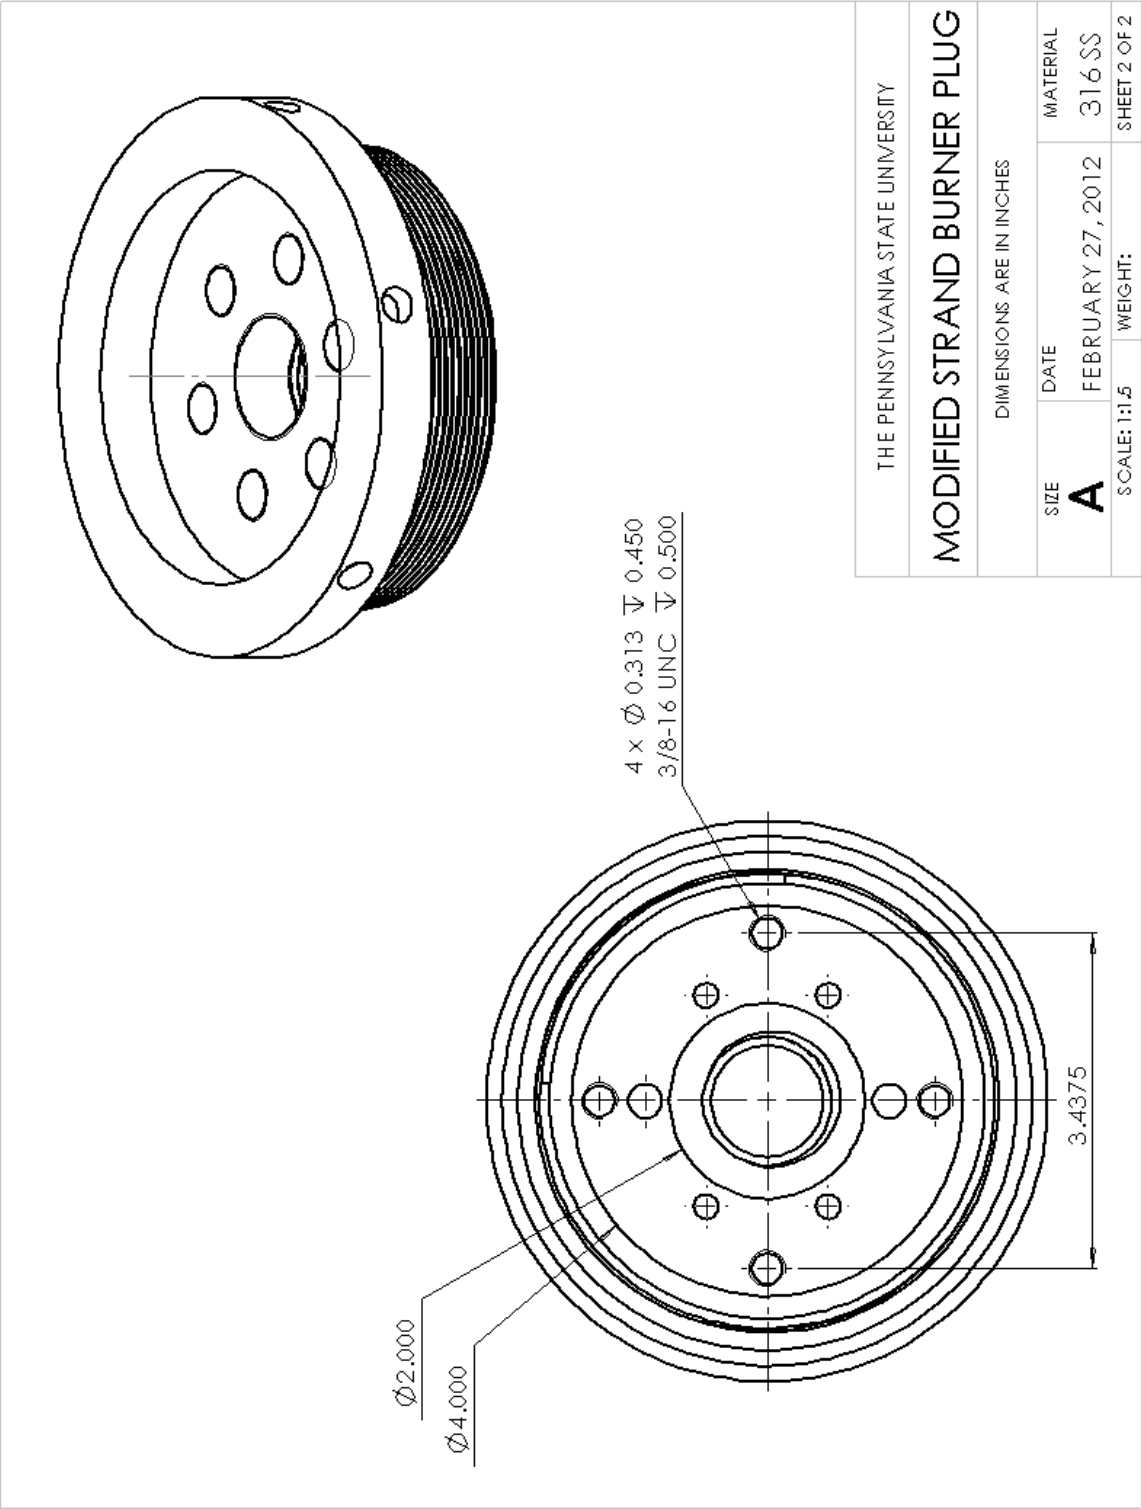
Drawing of modifications to bottom of strand burner plug to accommodate counterflow burner.
